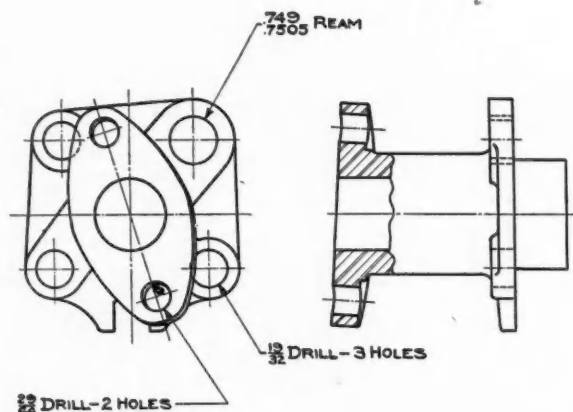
Steering gear case drilled and reamed on the machine shown in Fig. 5. The indexing fixture is not automatic but could be so arranged if production warranted
